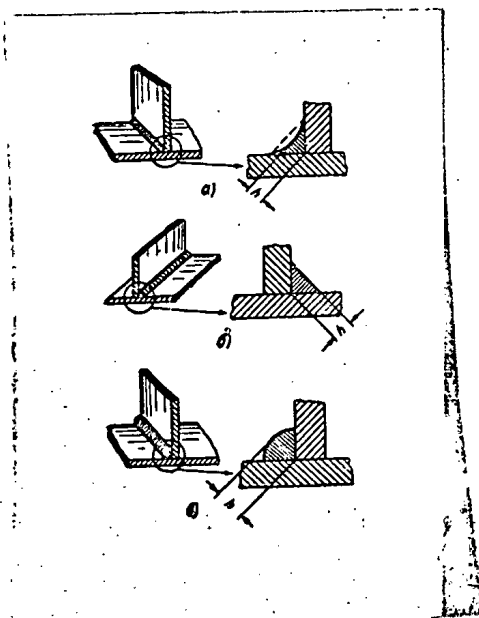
Classification of welds according to shape of bead cross-section.
